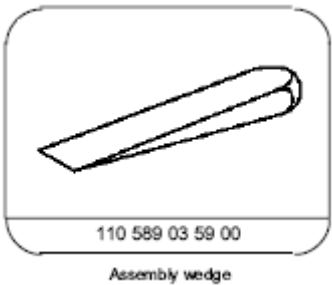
Identifying Assembly Wedge (110 589 03 59 00)
